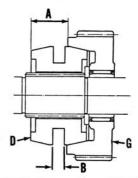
To measure drive cone (D) contact face wear, place forwardheverse gear (G) on appropriate contact face and measure distance (A). Shifter slot measurement is taken at point (B).
